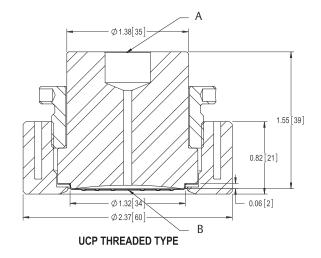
UCP and PMW Threaded Pipe Mount Seals
